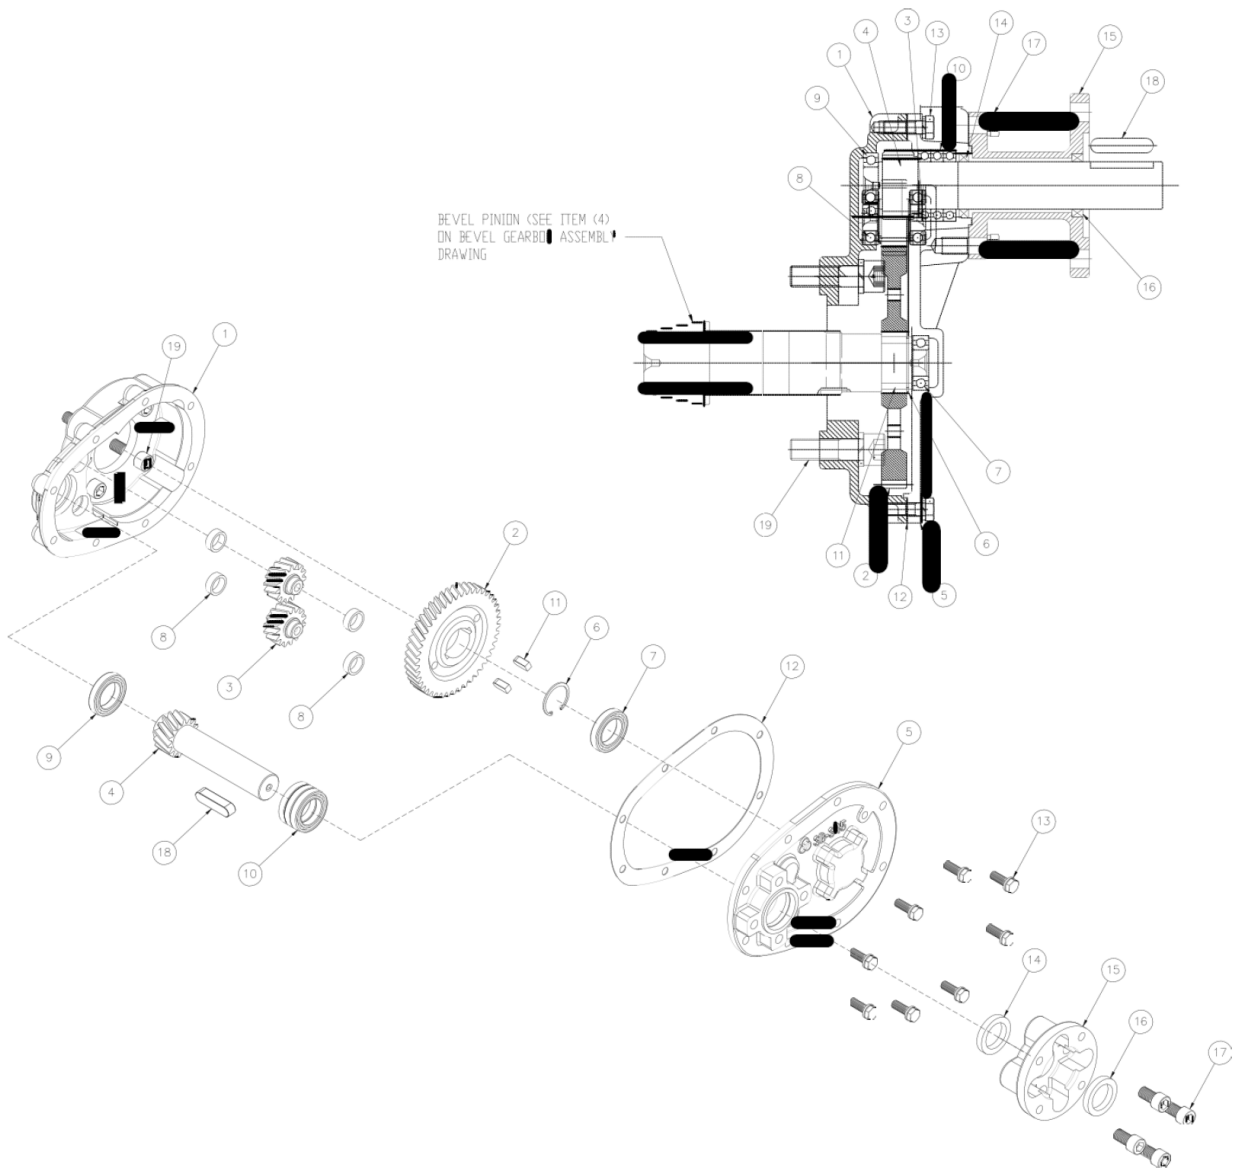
SB-V0 through SB-V9, and SB-V35H through SB-V9H Spur Gear Attachment (1S) Exploded View
